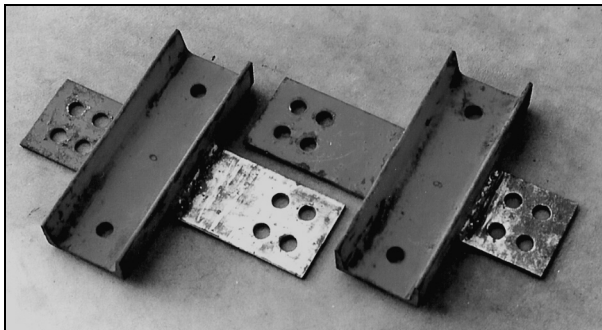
Two of seven salvaged production weldments before the final test series. The darker locations show the original paint and rust. The shiny areas show the contacting surfaces after stripping paint with a wire brush wheel.
